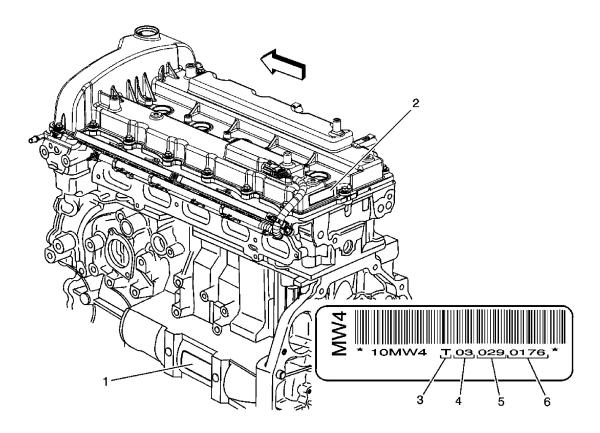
Locating Engine ID Tag Courtesy of GENERAL MOTORS CORP.
